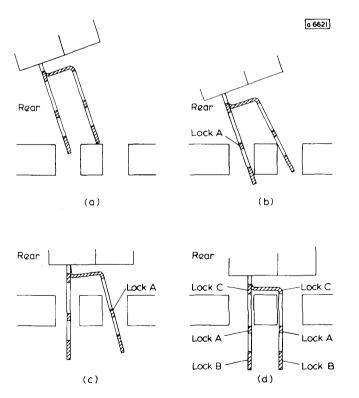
Mounting procedure for "Lockfit" transistors using e-grid printed-wiring boards; procedure is similar for ε-grid boards
